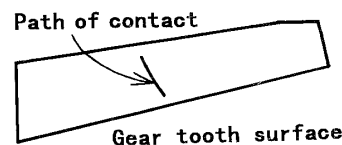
Path of contact on gear tooth surface of convex side ( $R_{sg}=70.544$  mm,  $e=17.270$  mm)
